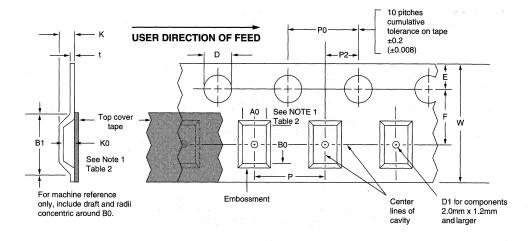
EMBOSSED CARRIER DIMENSIONS
